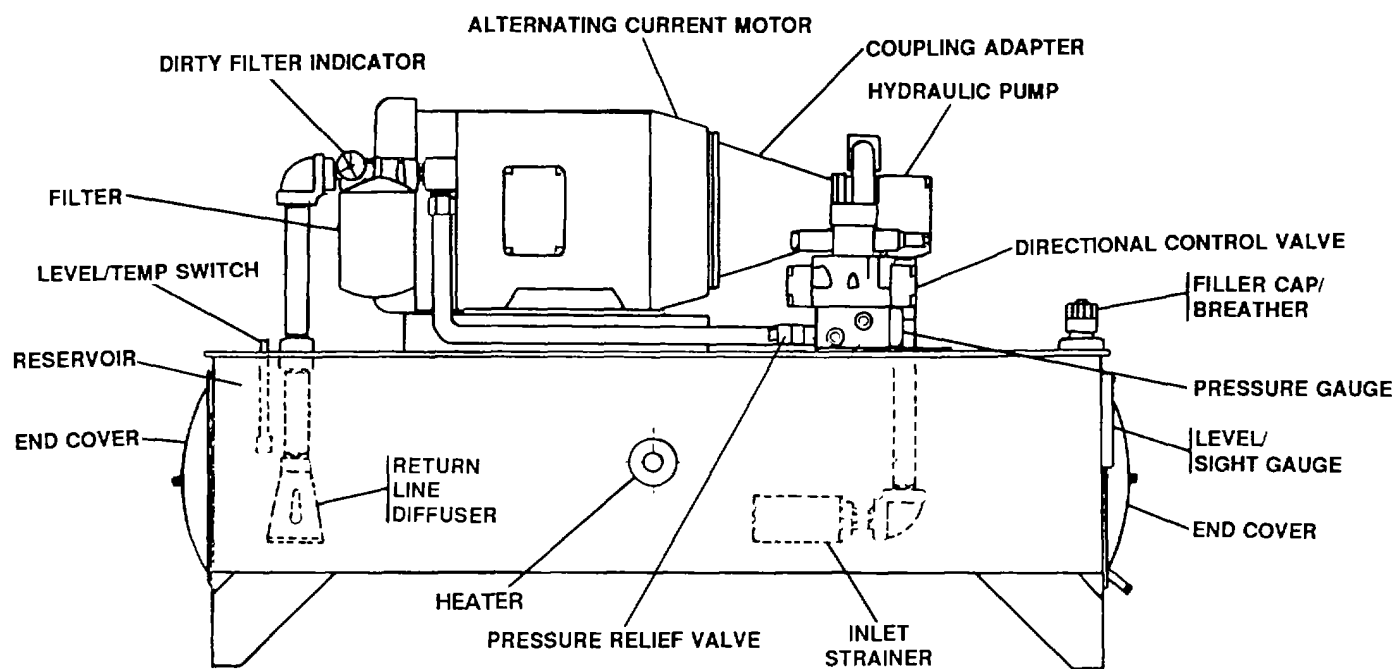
Hydraulic Power Pack Assembly Component Location.
